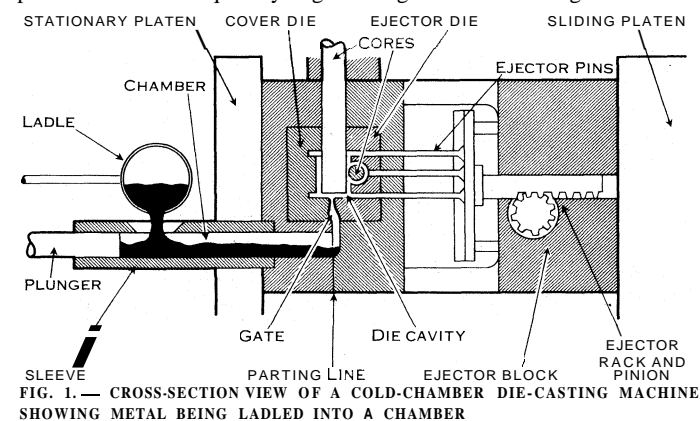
CROSS-SECTION VIEW OF A COLD-CHAMBER DIE-CASTING MACHINE SHOWING METAL BEING LADLED INTO A CHAMBER
